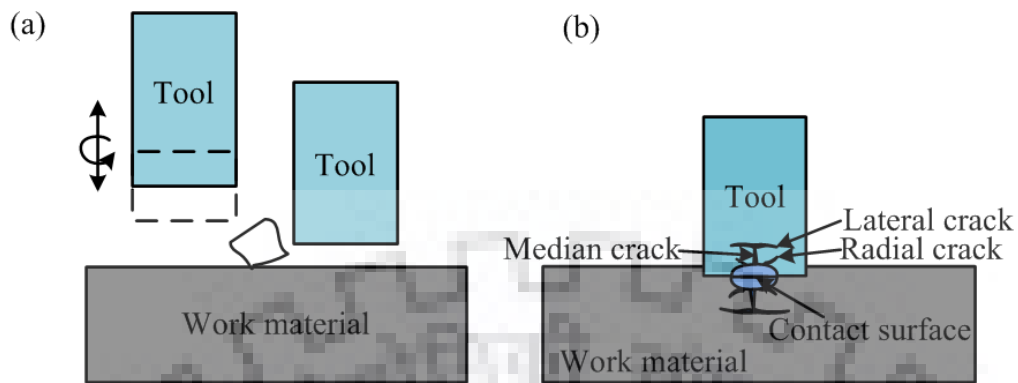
Tool-work direct interaction (a) restricted abrasive particle (b) brittle fracture
